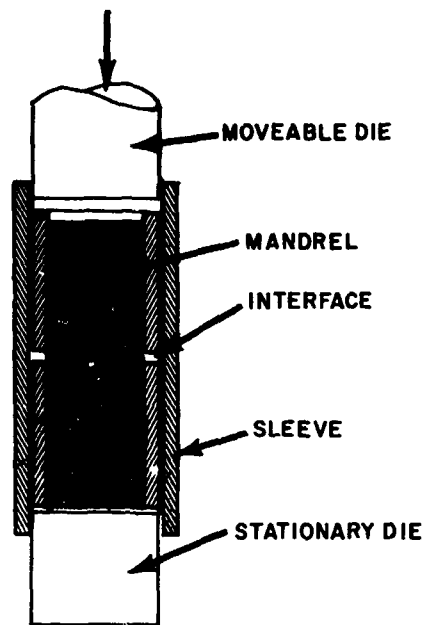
Press Welding a Tube Using a Sleeve and Mandrel
